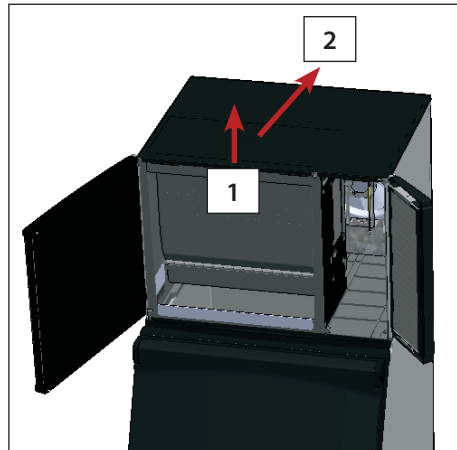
Lift the front edge, slide the top panel back, then lift to remove.
